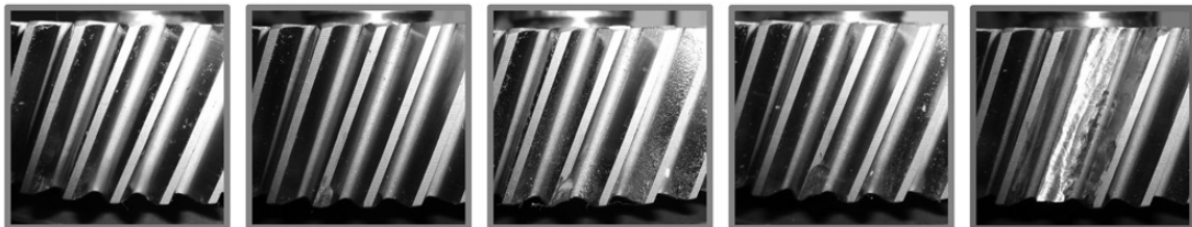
Gearbox teeth. From healthy tooth (left) to missing tooth (right)
